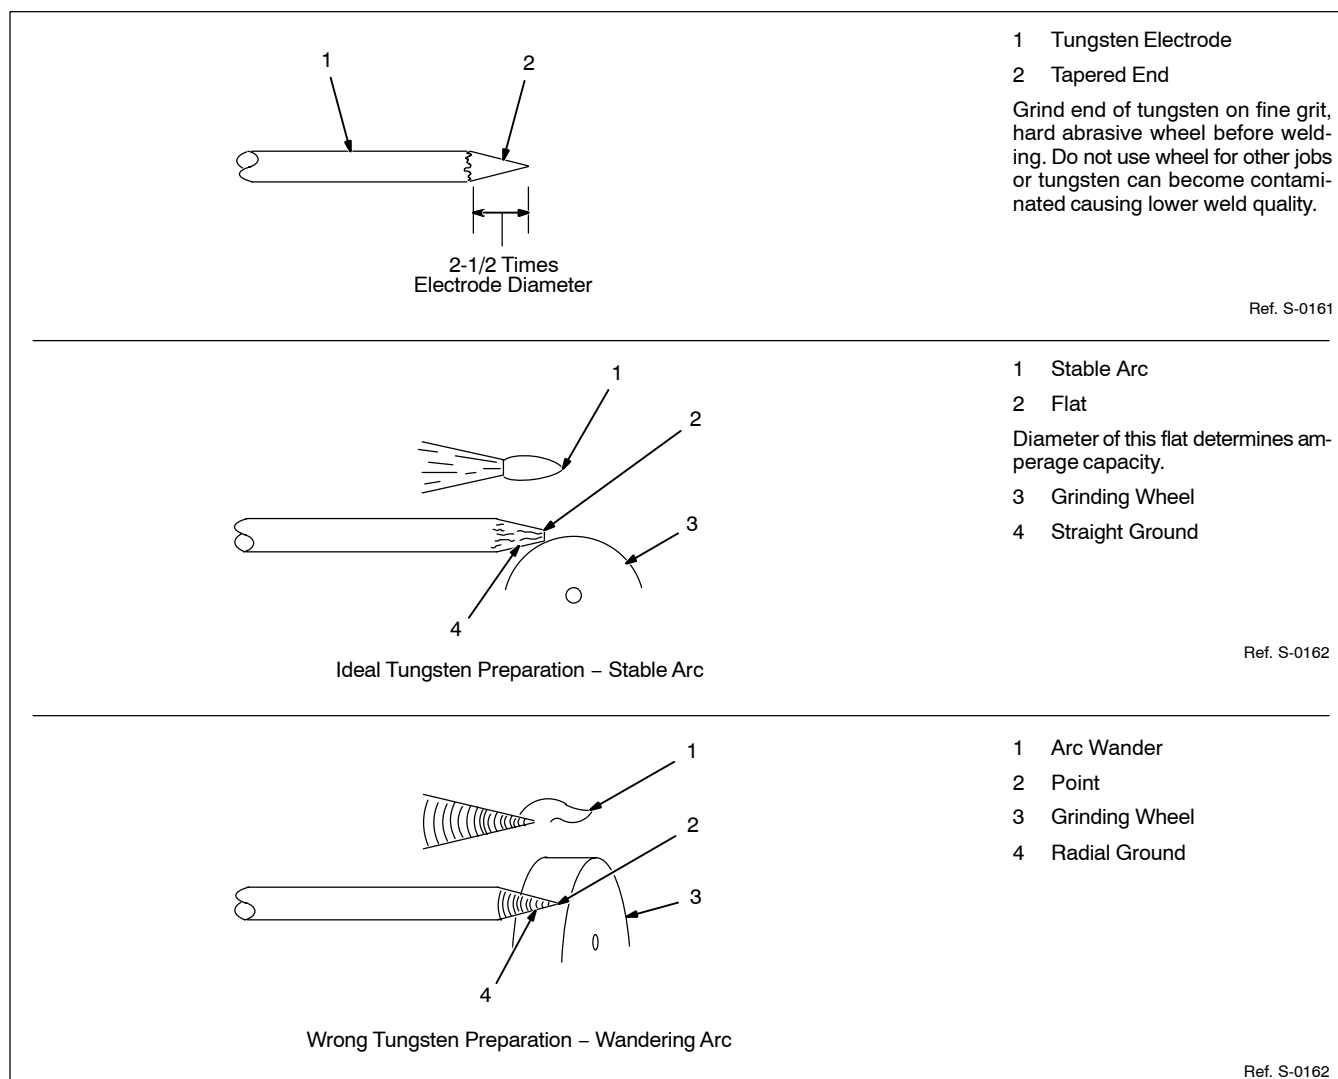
Preparing Tungsten For DC Electrode Negative (DCEN) Welding
